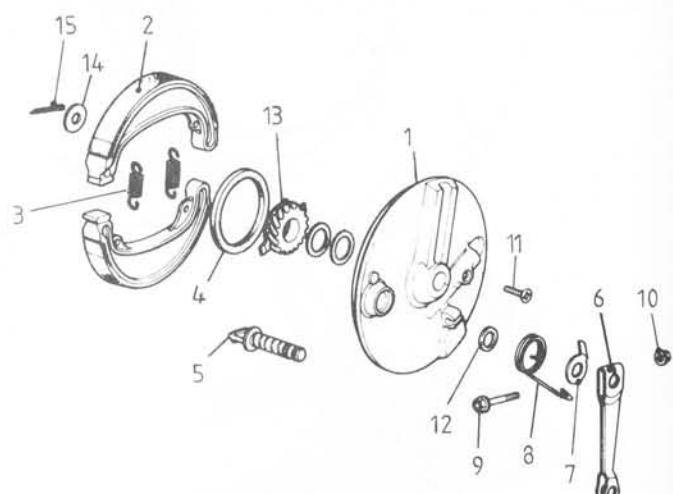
Front brake assembly – CM125 C and CD125 T
